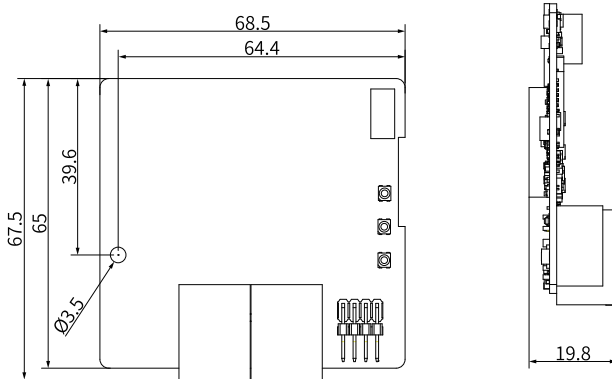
Dimensions of MD580-SI-ECAT1 card (mm)
